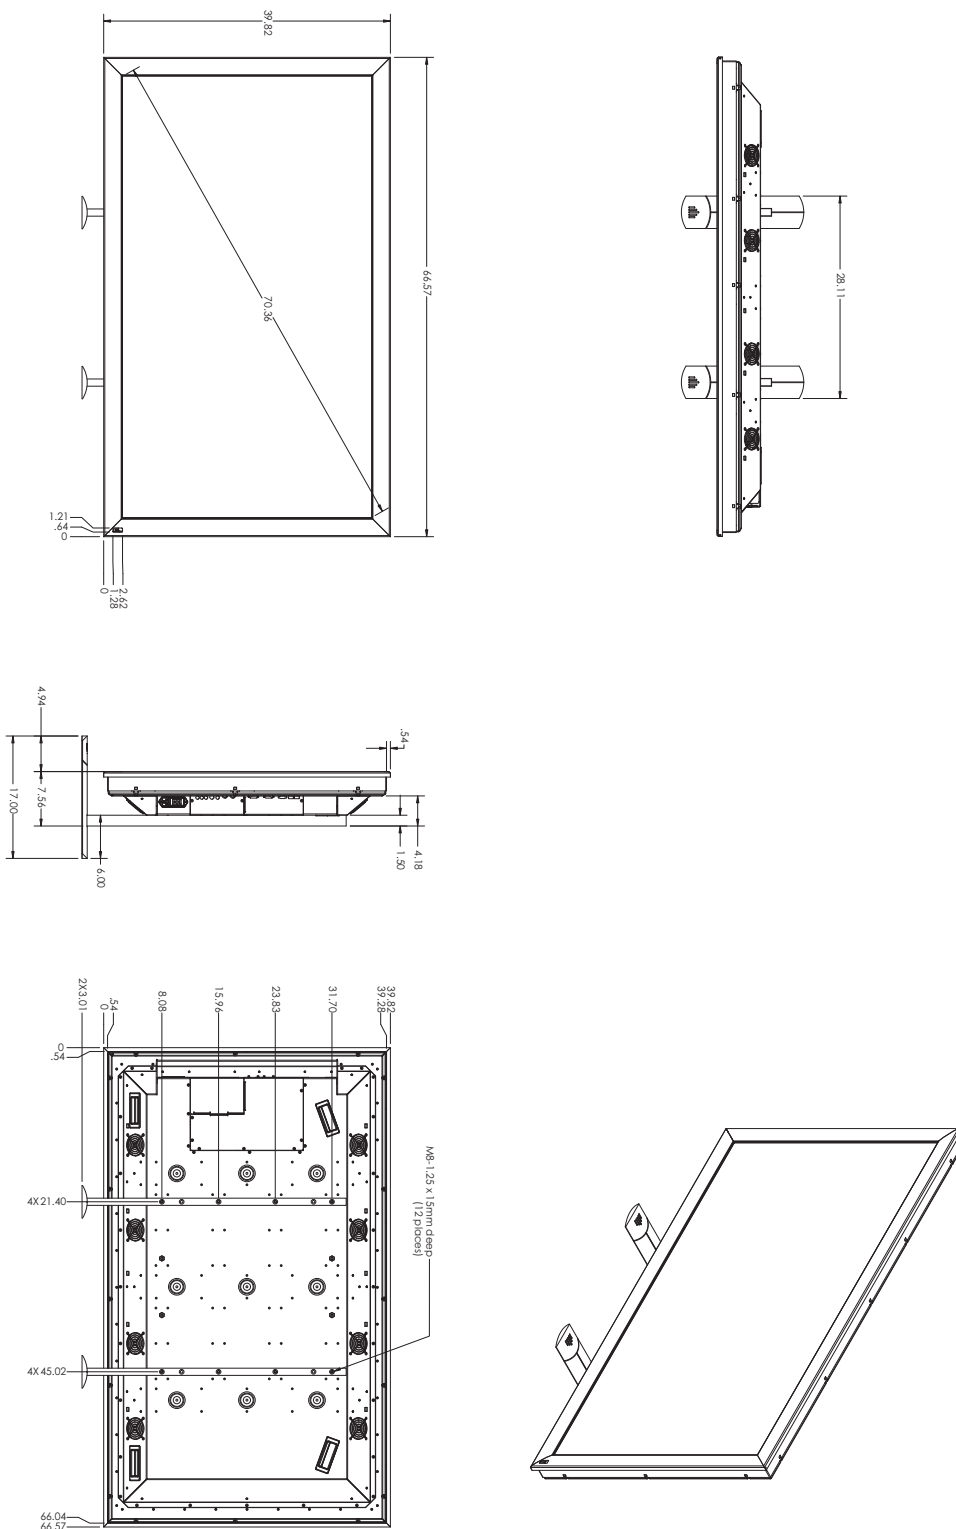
CX-70DHD Dimensions (with Table Stand)
